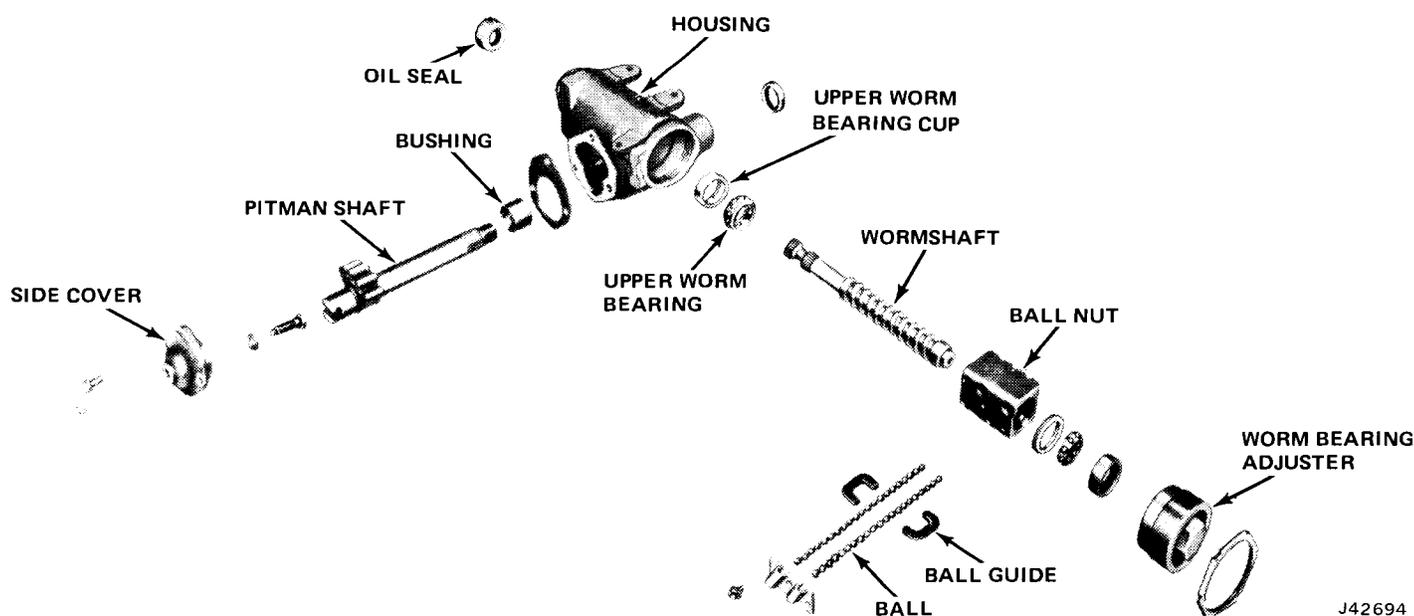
Left-Hand Drive Manual Steering Gear
